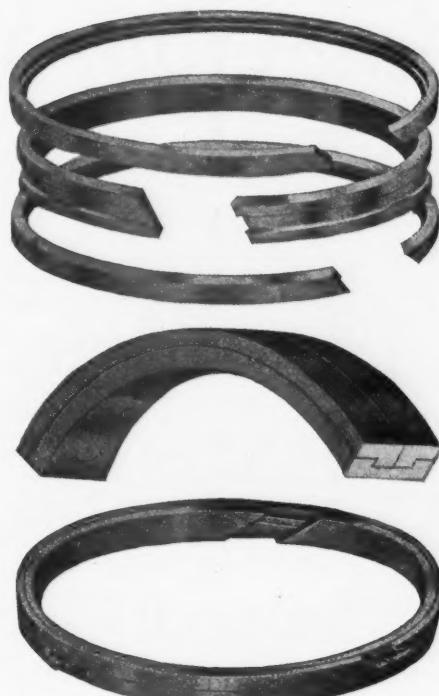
Ever-Tight piston rings, which is made up of three parts which interlock as shown in the center illustration.
